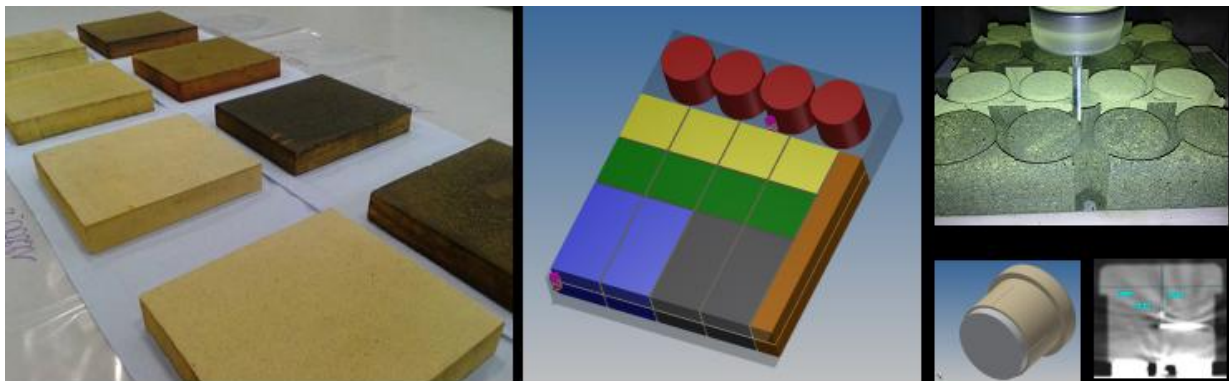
Ablator plates manufactured by Airbus for screening tests (left), sample cut-out plan from a plate (middle), arc-jet sample fabrication and thermo-couple integration/ position measurement at HPSP (right)
